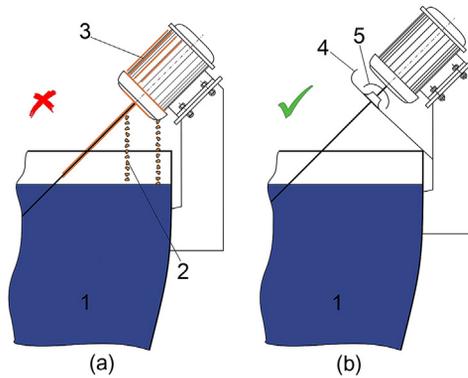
(a) A motor and cabling mounted over any exposed product (1) can contaminate it by soil, condensate or lubricants (2). (b) The motor drive (3) and power line should be placed beside the equipment. A self-draining protection sheet with “upstand” (4) in combination with a cowl (5) on the shaft must exclude any food safety risk. The bottom side of the thrower ring (cowl) should be made inspectable (Lelieveld et al., 2003; Hauser et al., 2004b).
